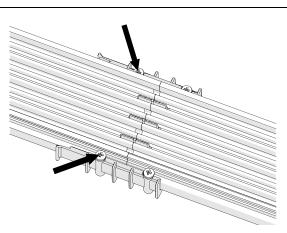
Fix the connector cap on both sides with cross-head screws.
